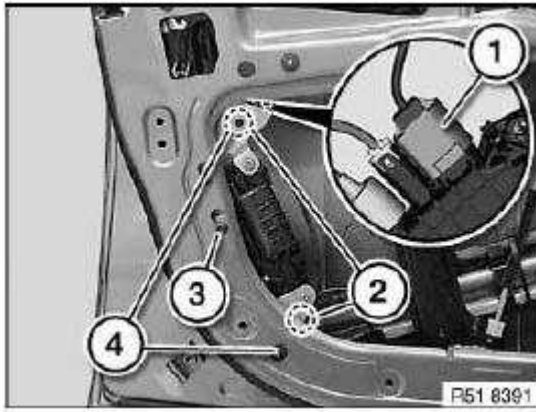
Plug Connection, Cable Tie, Screw And Nuts
